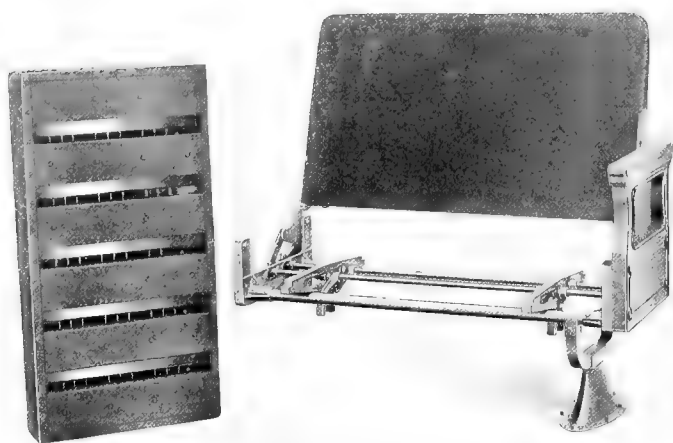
Pressed Steel Seat and One-Piece Pressed Steel Cushion Frame.
